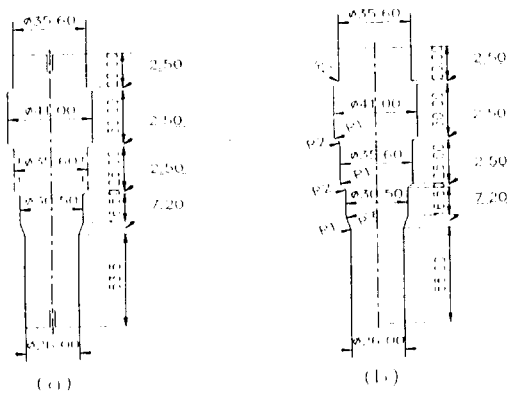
An example of forging design : (a) assembly ready part; and (b) cold forgeable part.
